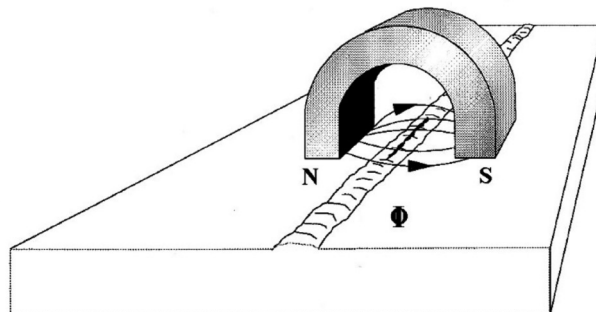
A permanent magnet used to locate a crack in a weld
